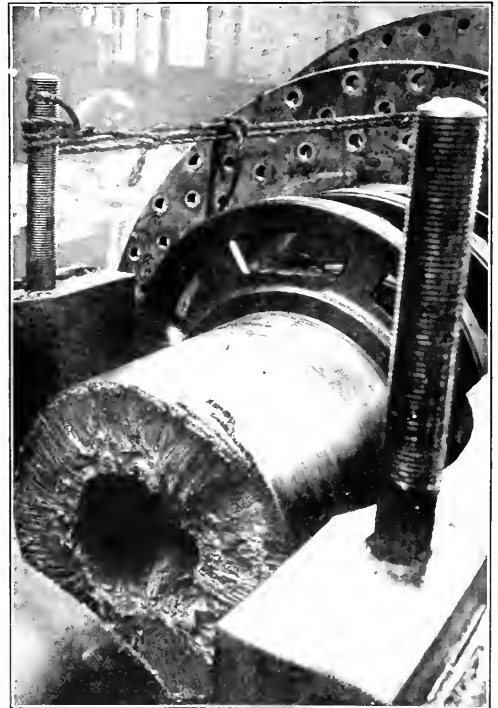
THIS 32-IN. SHAFT, 16-IN. HOLE, CUT THROUGH IN THREE HOURS WITH OXYACETYLENE TORCH
